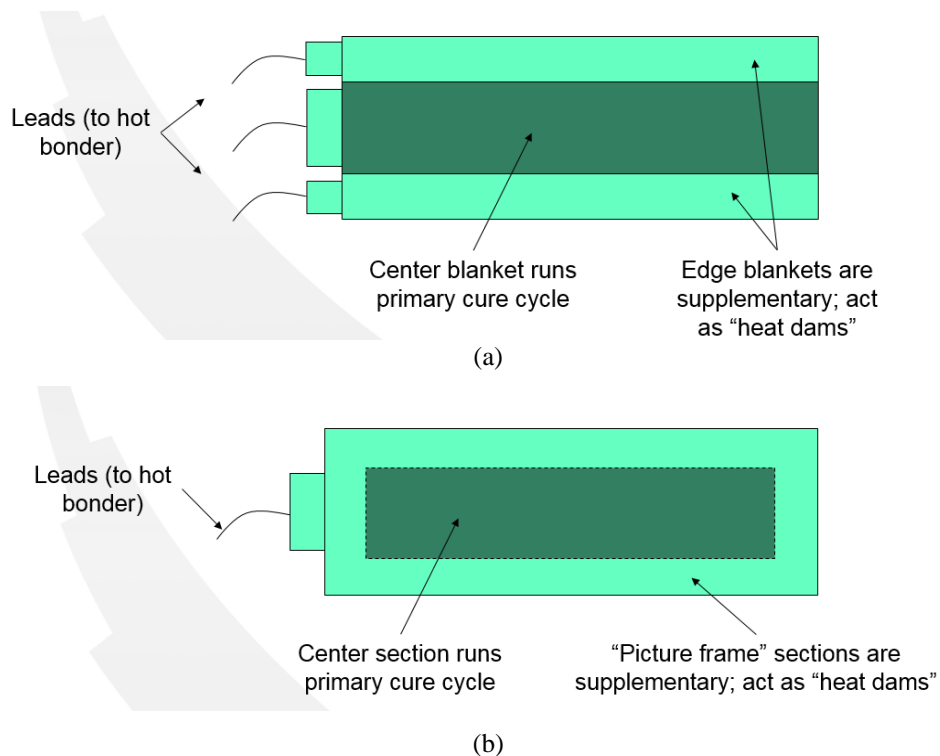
Heat blanket configurations considered herein: (a) heat blanket configuration used on PLA MDA (where 3 separate heat blankets are used in a multi-zone cure) and (b) enhanced heat blanket configuration (which entails a single multi-zone heat blanket) based on lessons learned from full-scale work on PLA MDA.
